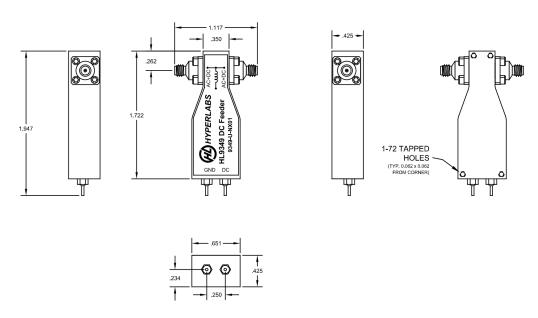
HL9349 with DC bias pins Mechanical Drawing
